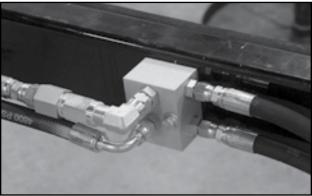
Hydraulic Manifold to Drive Wheel Lift Cylinder
